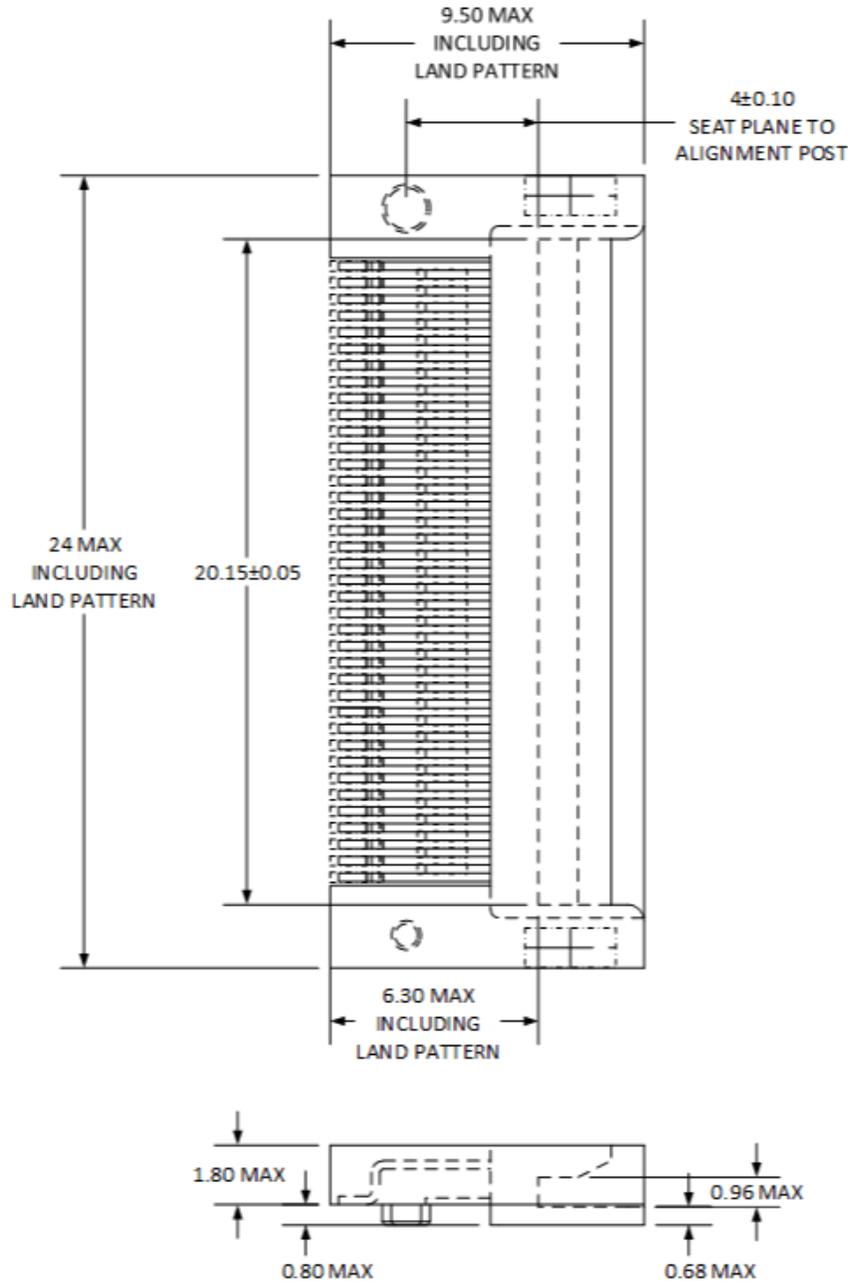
Mid-mount (In-line) Connector Dimensions
